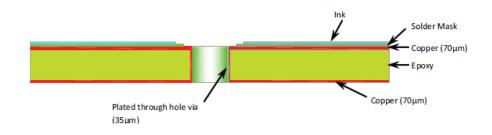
Typical cross section of an FR4 PCB based on an open via PTH design.
